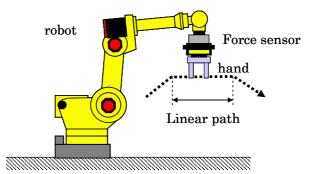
(a) Basis measurement (without a workpiece)
